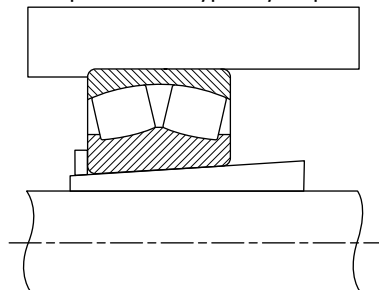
Spherical roller bearing mounted with an adapter sleeve.
